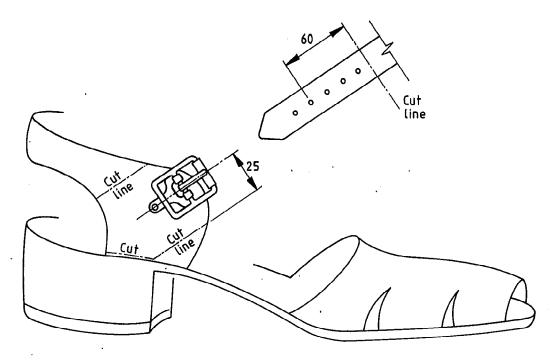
/2a. Buckle attached by a chape to a sling-back strap (Strap wide enough to enable a type A test piece to be cut)
